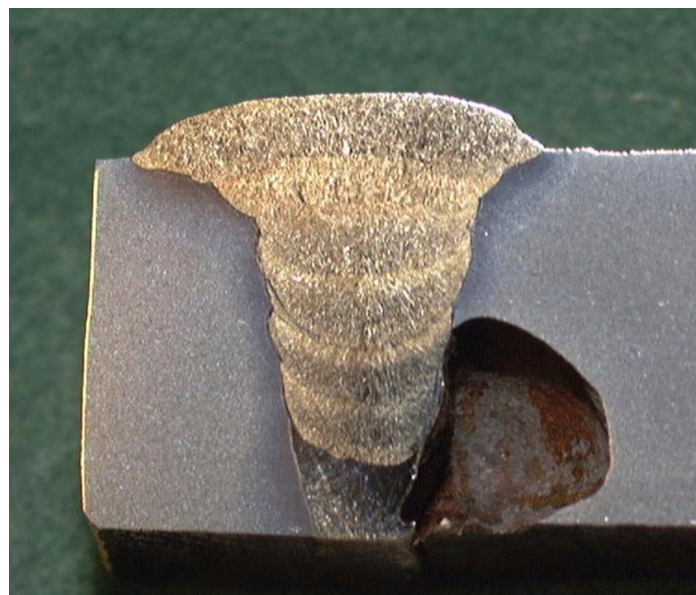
Pitting of Super 13Cr due to exposure to seawater
